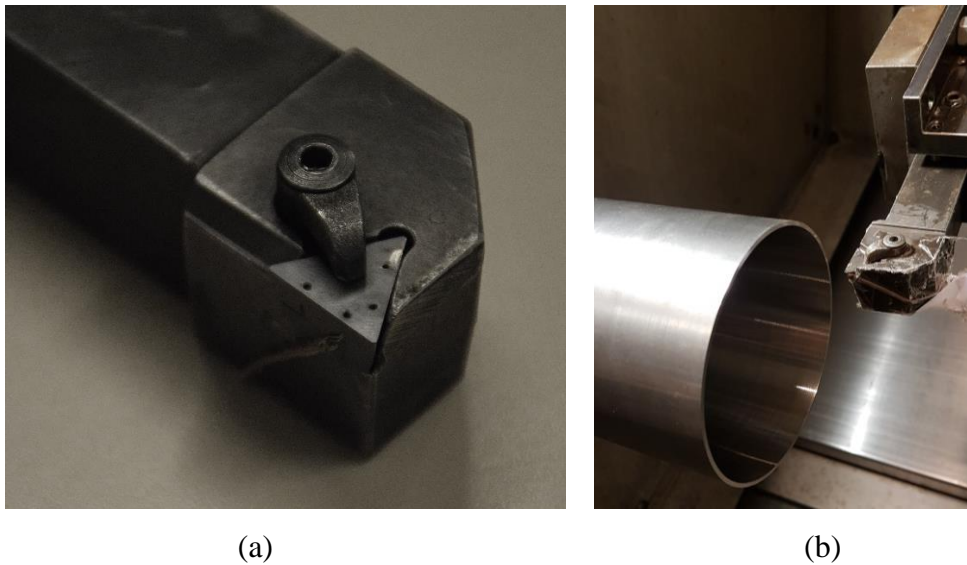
(a) Thermocouple holes on the rake and flank face drilled with EDM, (b) Experimental setup for oblique cutting tests.
